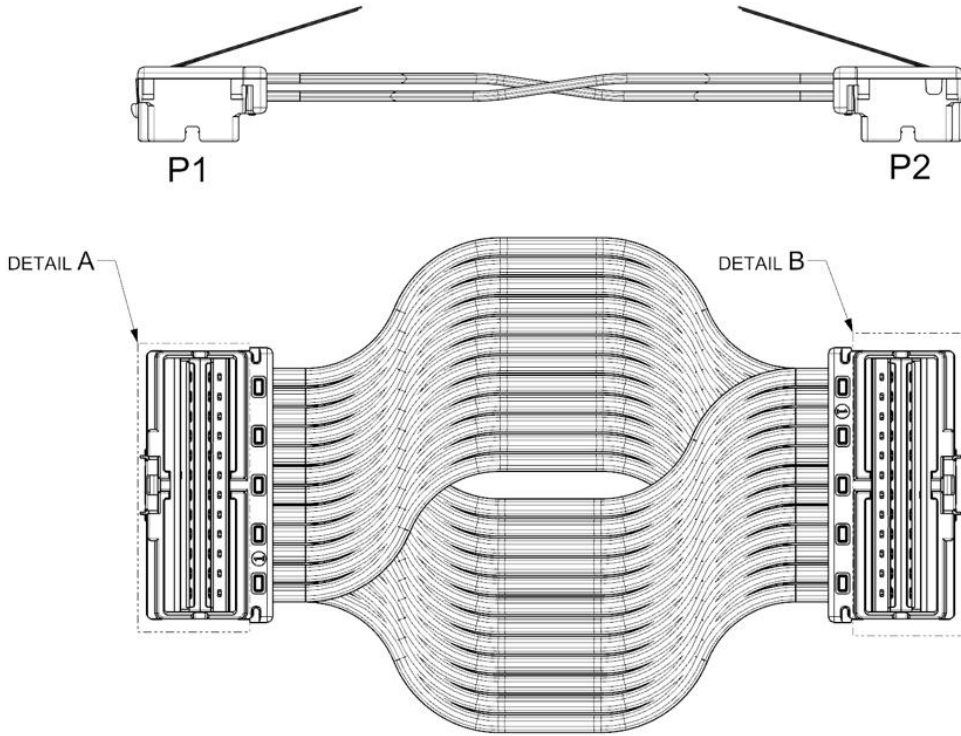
Cable Assembly Free-Side Connector Numbering
